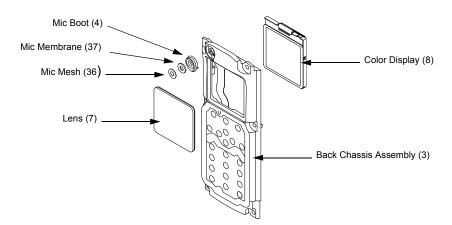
Back Chassis Assembly (Dual Display Versions) NOTE: Take care not to damage the Color Display during disassembly.
